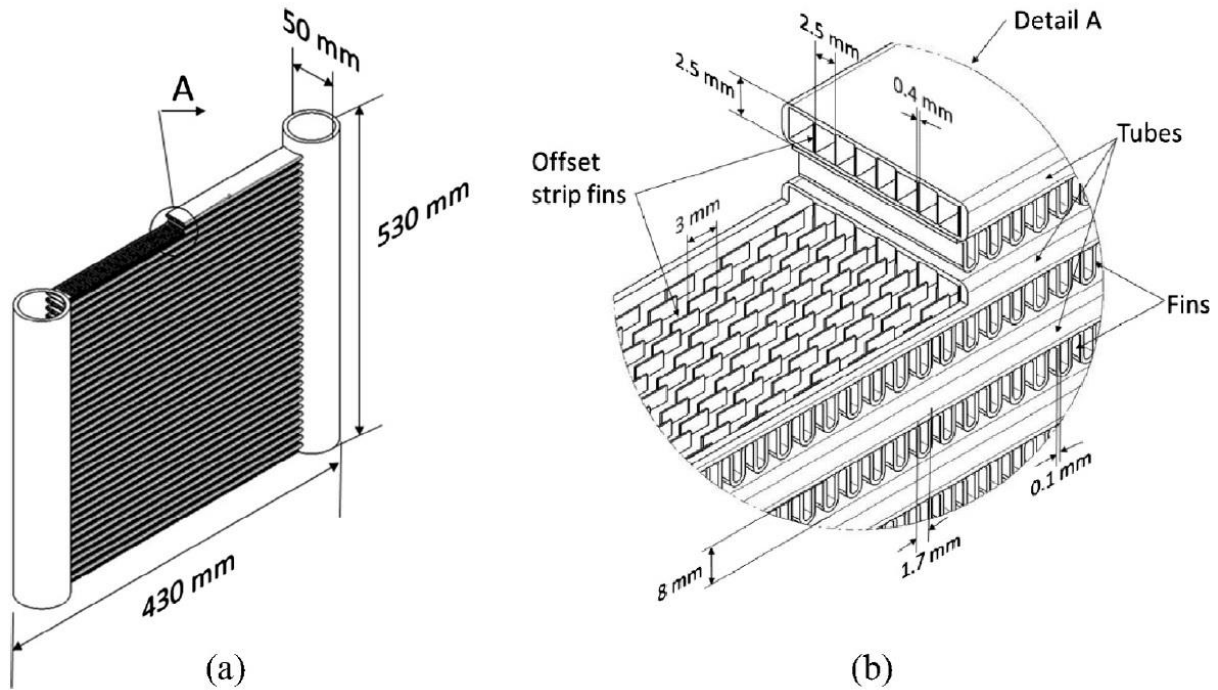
Stock microchannel aluminum oil cooler with plain fins on the air side and offset strip fins on the oil side: (a) overall dimensions, (b) microchannel detail [8]
